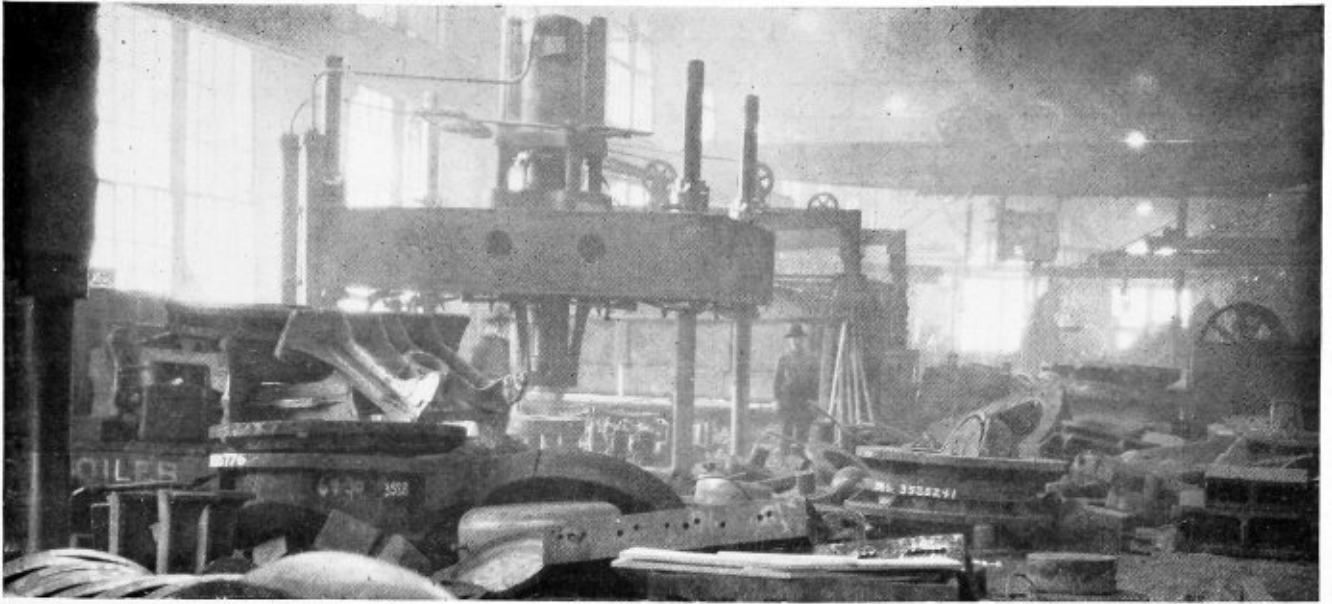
Looking down the flanging department at the Schenectady plant of the Alco Works
